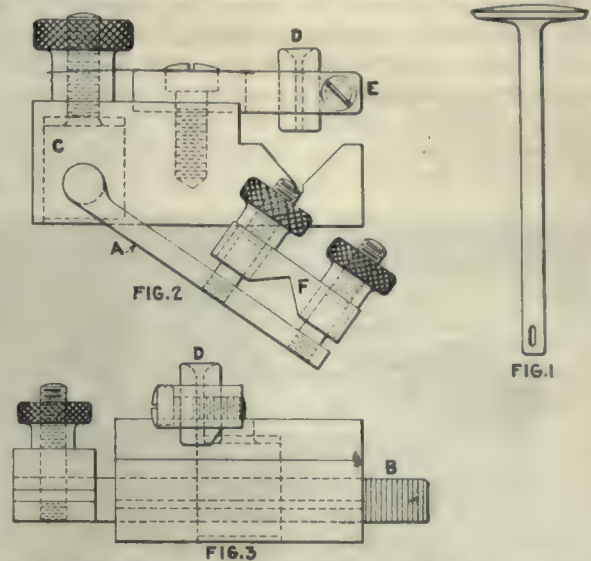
THE VALVE TO BE DRILLED. FIG. 2—DETAILS OF DRILLING FIXTURE. FIG. 3—SIDE VIEW SHOWING GRADUATIONS
